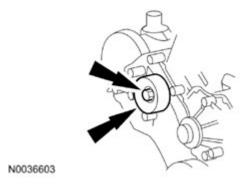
Locating Accessory Drive Belt Idler Pulley And Bolt Courtesy of FORD MOTOR CO.
